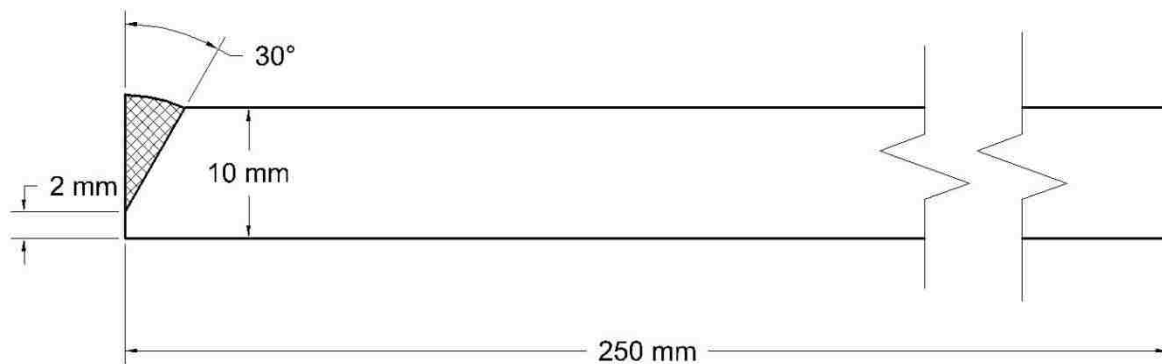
Geometry of Axisymmetric 2-D model of Pipe Welding
